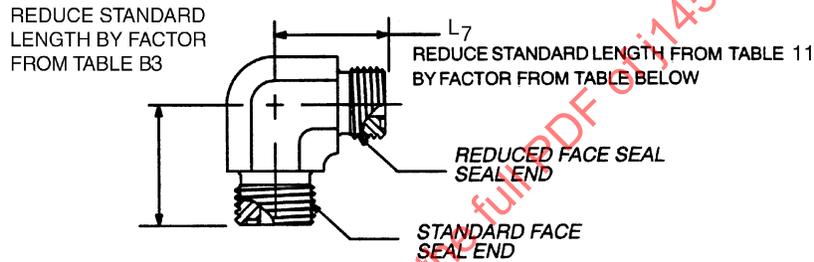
SHAPED FACE SEAL CONNECTORS WITH SMALLER FACE SEAL END (520201)
